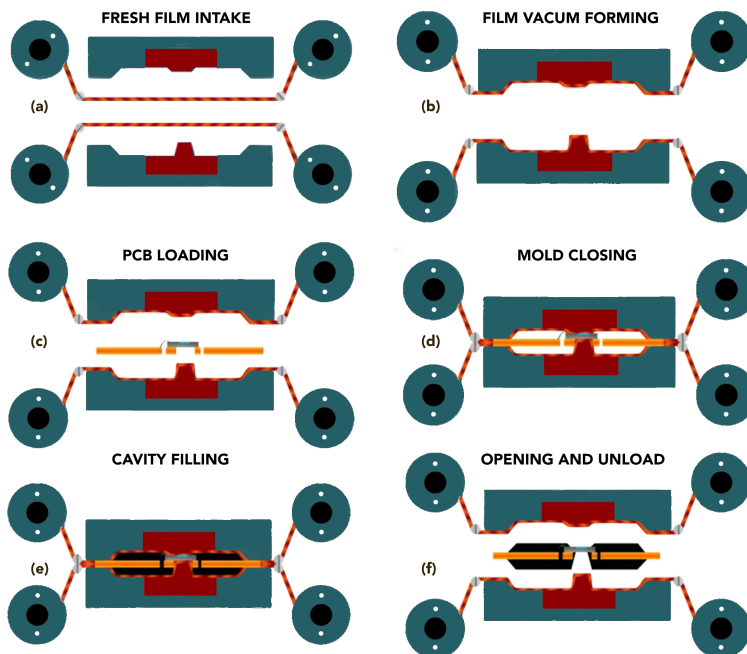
Process flow for the Film-Assisted Molding of the plate: (a) two Teflon films are rolled inside the mold; (b) the films are sucked into the inner surface of the mold; (c) the PCB is loaded inside the mold; (d) the mold is closed; (e) the liquefied epoxy material is injected in the mold and cured; (f) the mold is opened and the plate is unloaded. The figures are not drawn to scale. Figure adapted from [15].
